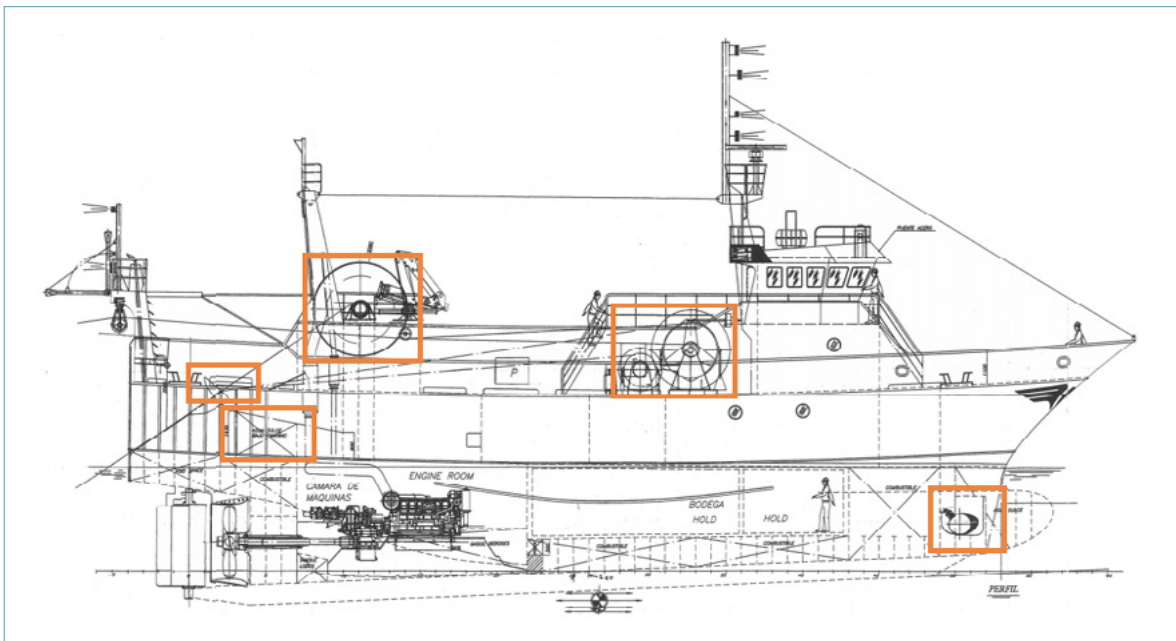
Ship plan under Dutch flag - side elevation (2018). (Source: Stability book UK-160)
